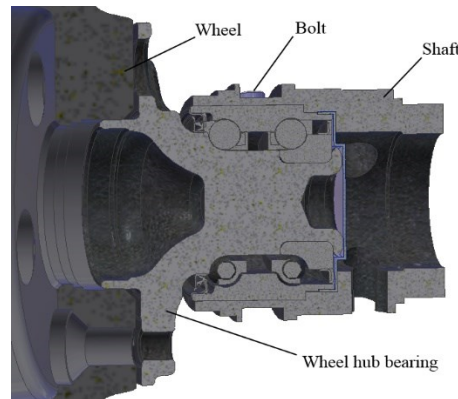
Integrated wheel hub bearing BAR-0230 [174]
